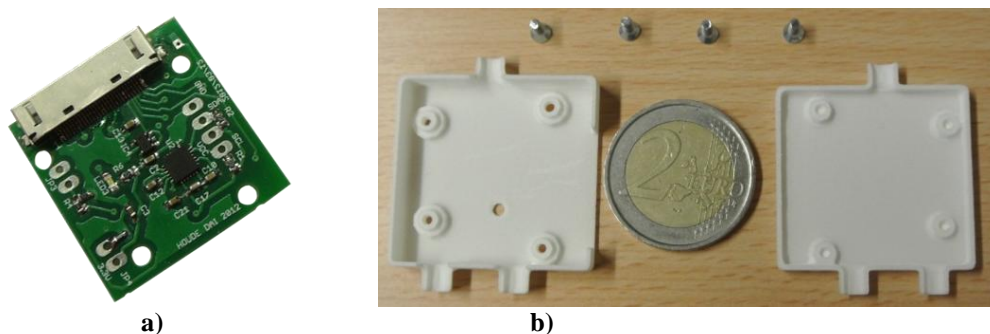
Photos of the circuit board and housing of the command module. a) command board; b) housing with four screws (M2 × 6mm). There was also a prototype with only three screws.
